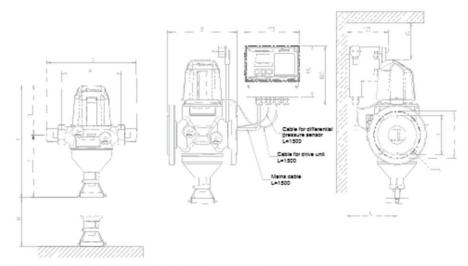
Dimensional drawing of GENO backwash filter MXA
